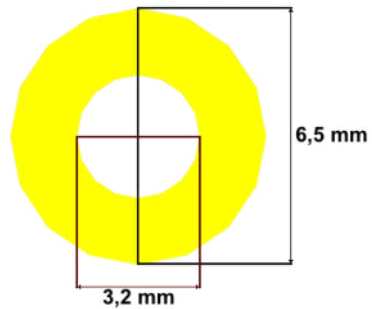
Dimensions of the mounting points, approx. values [mm]
